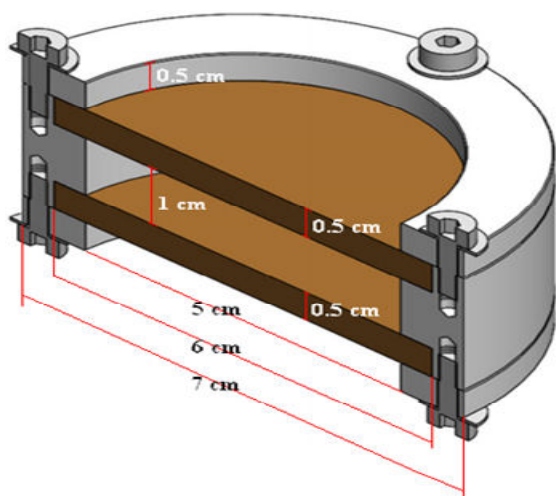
Cross-sectional view of the capacitance sensor with labeled dimensions
